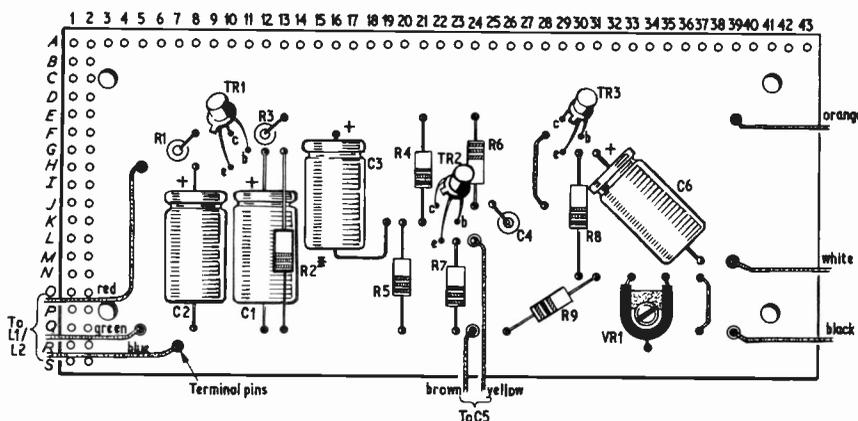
Assembly and wiring details of seismometer amplifier. Cut copper strips at the following: B4; B40; C4; C40; D4; D40; F18; G14; H14; N34; O5; O40; P5; P40; R5; R40
